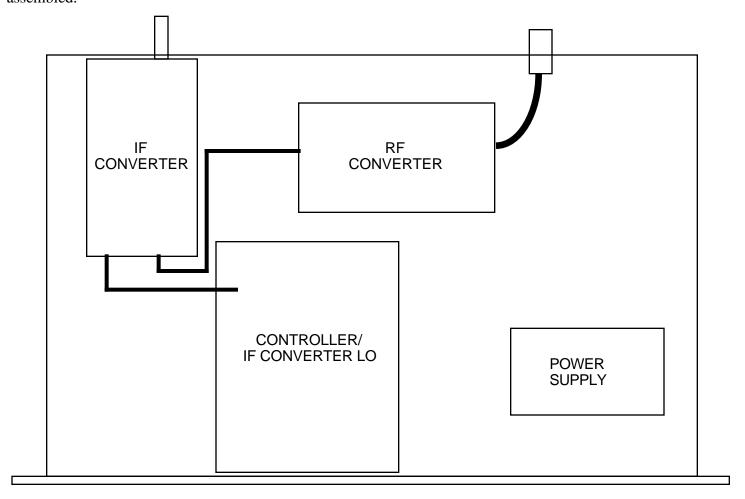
5089 MECHANICAL ASSEMBLY
